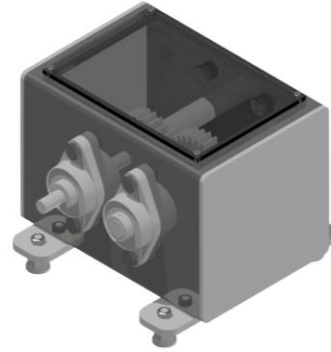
3D model of the dedicated gearbox module with a gear ratio of 1.23 – side view
